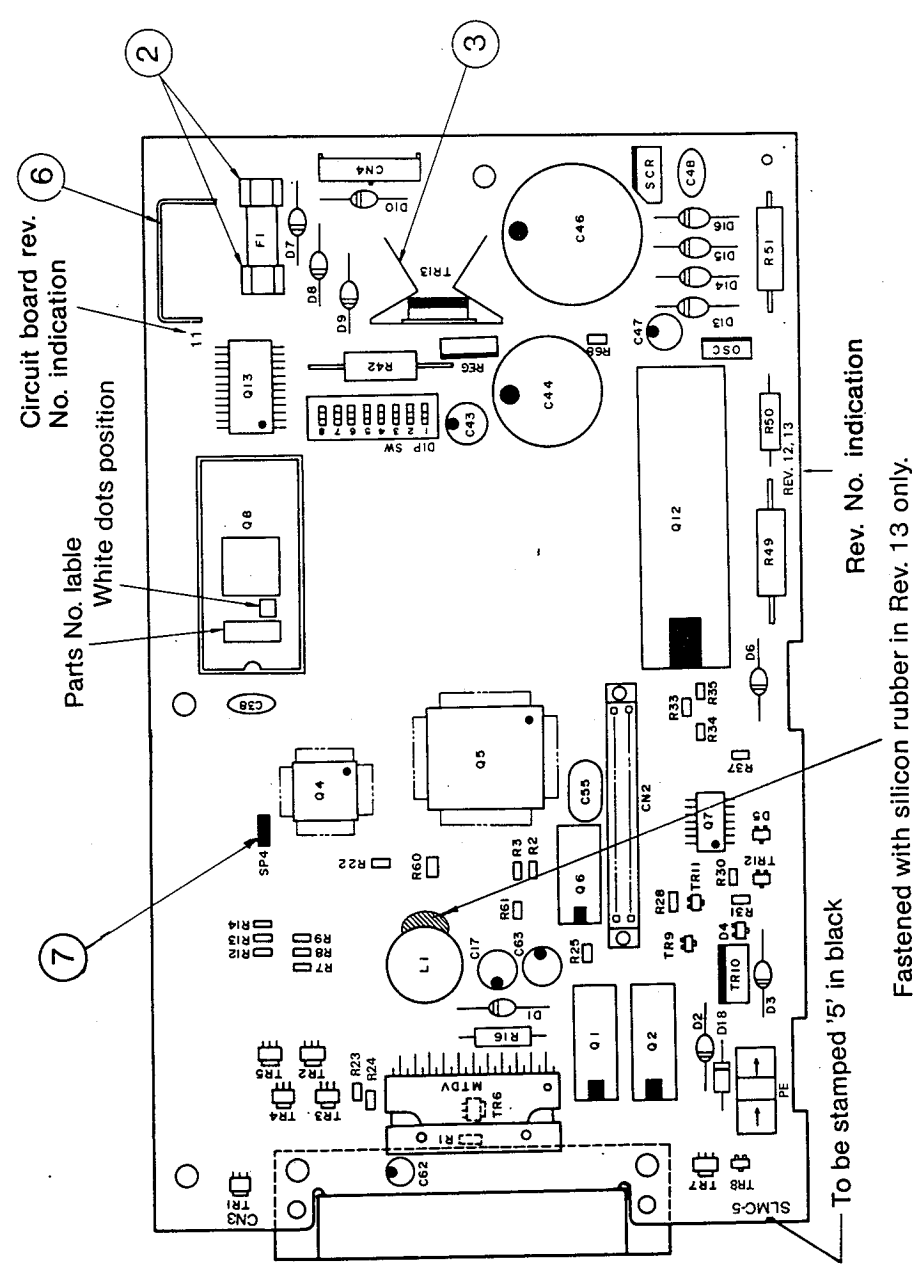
SLMC – 5 Printed-Circuit Board (4YA4021-1001Gxxx) 2/2 (3/4)
